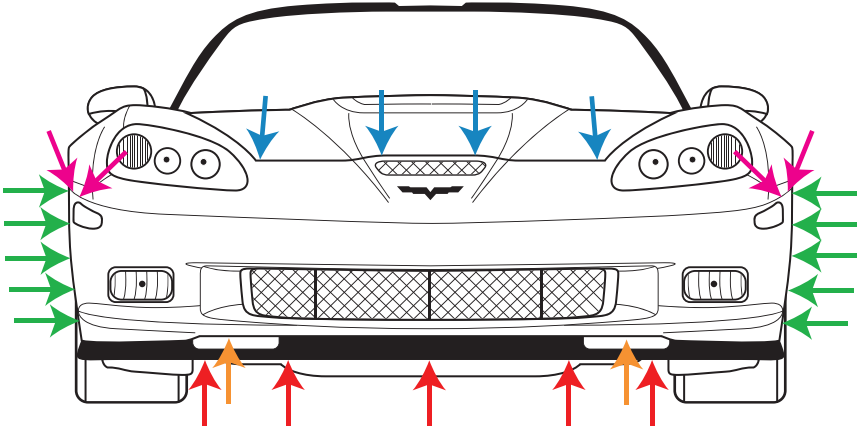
Locations of Fasteners Securing the Front Bumper Cover
